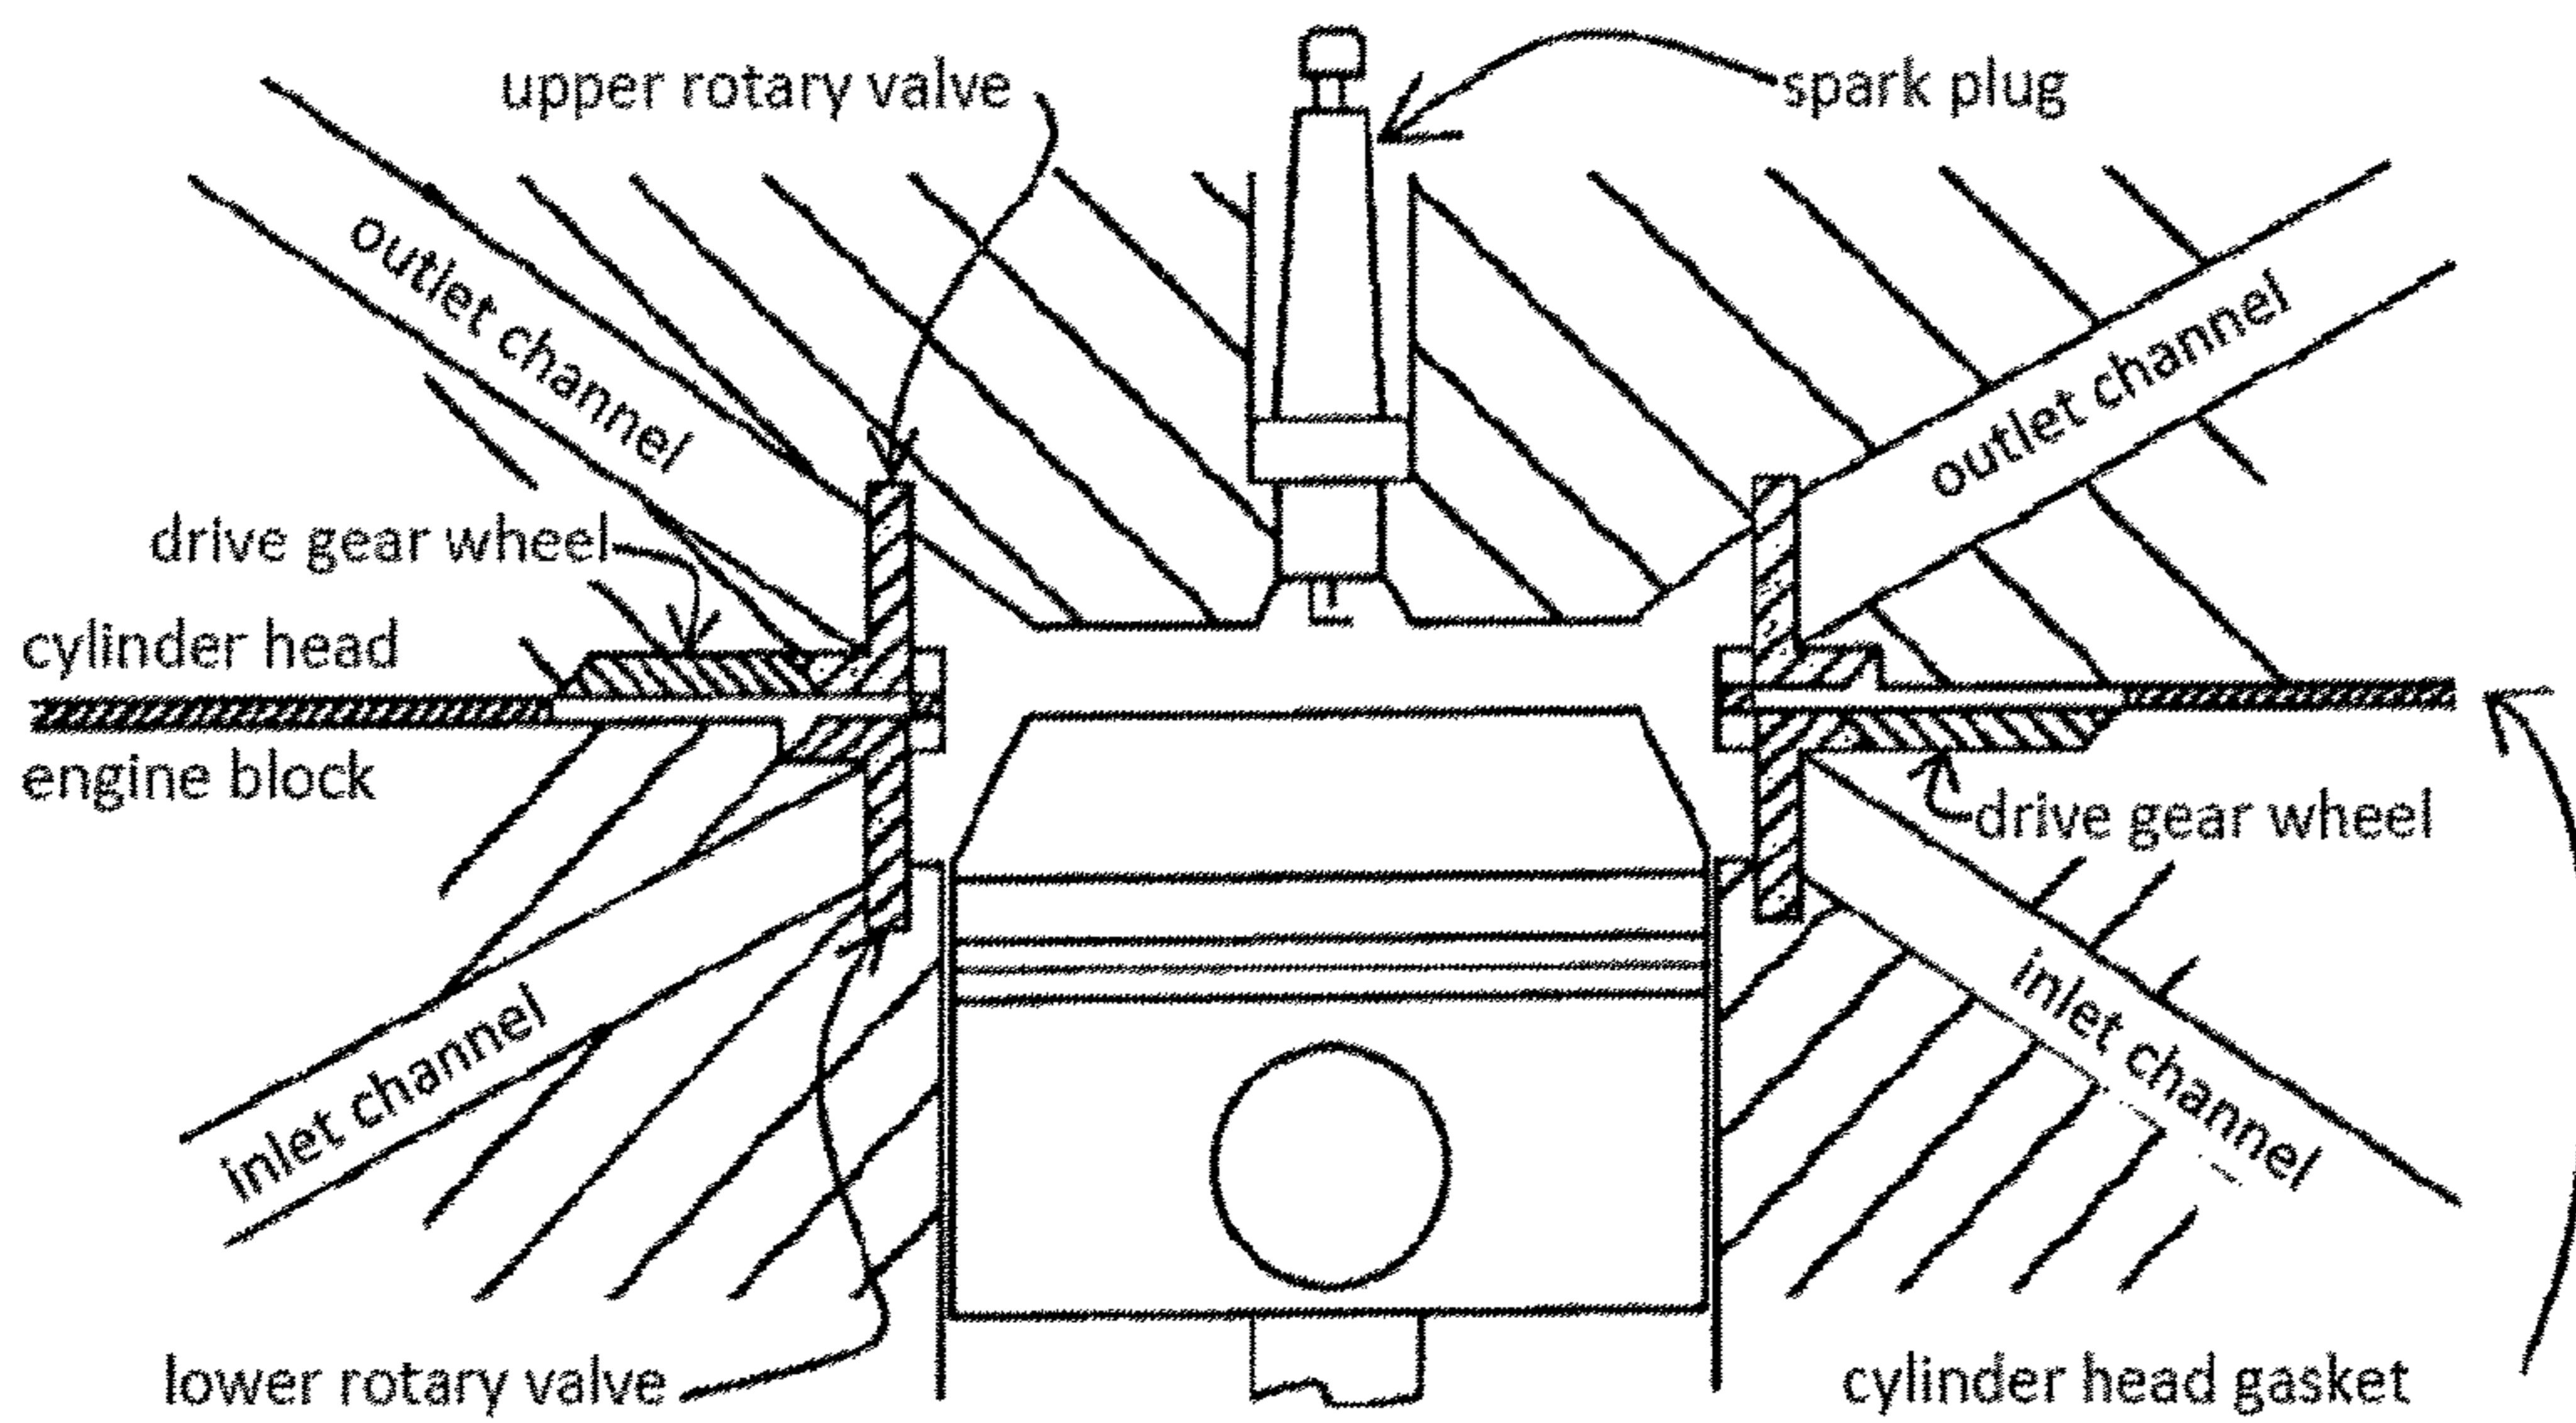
Cross-section of a four-stroke engine with a two-part (top and bottom) valve apparatus
